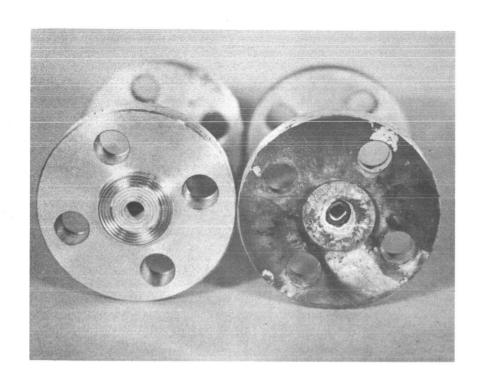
Exhibit Q - R to L. Mating flange to Annin valve exit, and first flange downstream from specimen holder.
